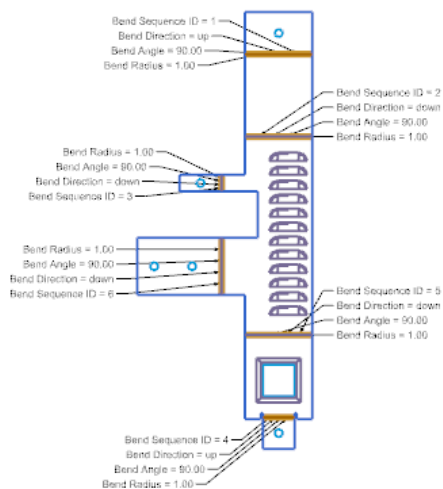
Flat pattern of the sheet metal part for Tutorial 1
